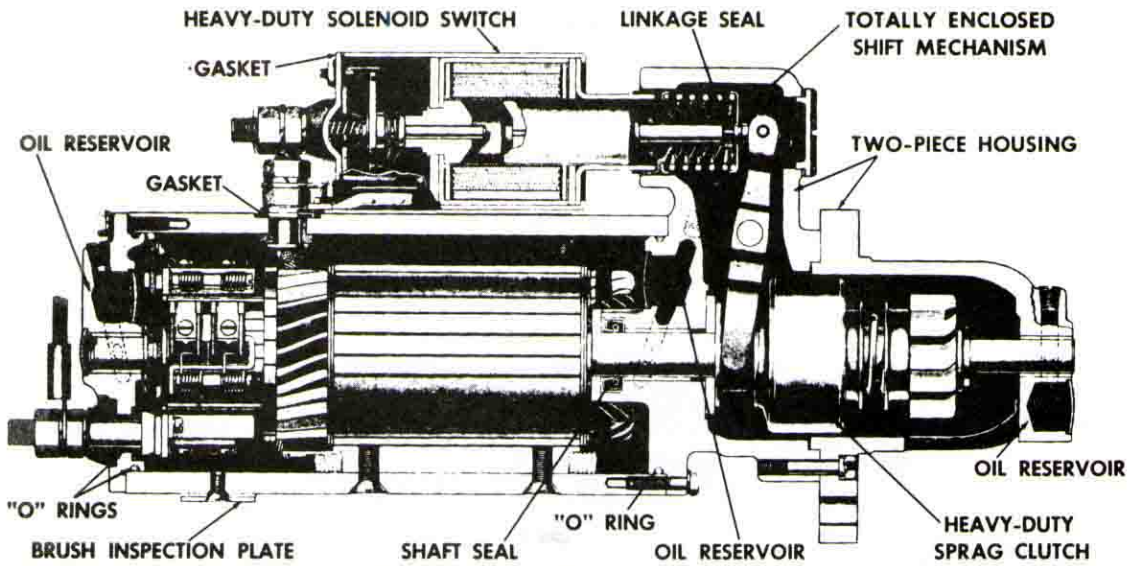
Cross-sectional view of motor with heavy duty sprag clutch.
